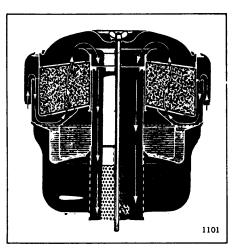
Light-Duty Oil Bath-Type Air Cleaner
